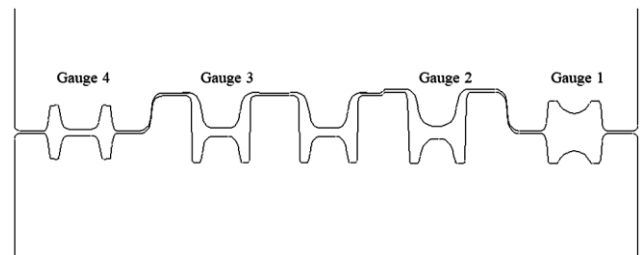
Schematic drawing of the gauges geometry without dimensions.
